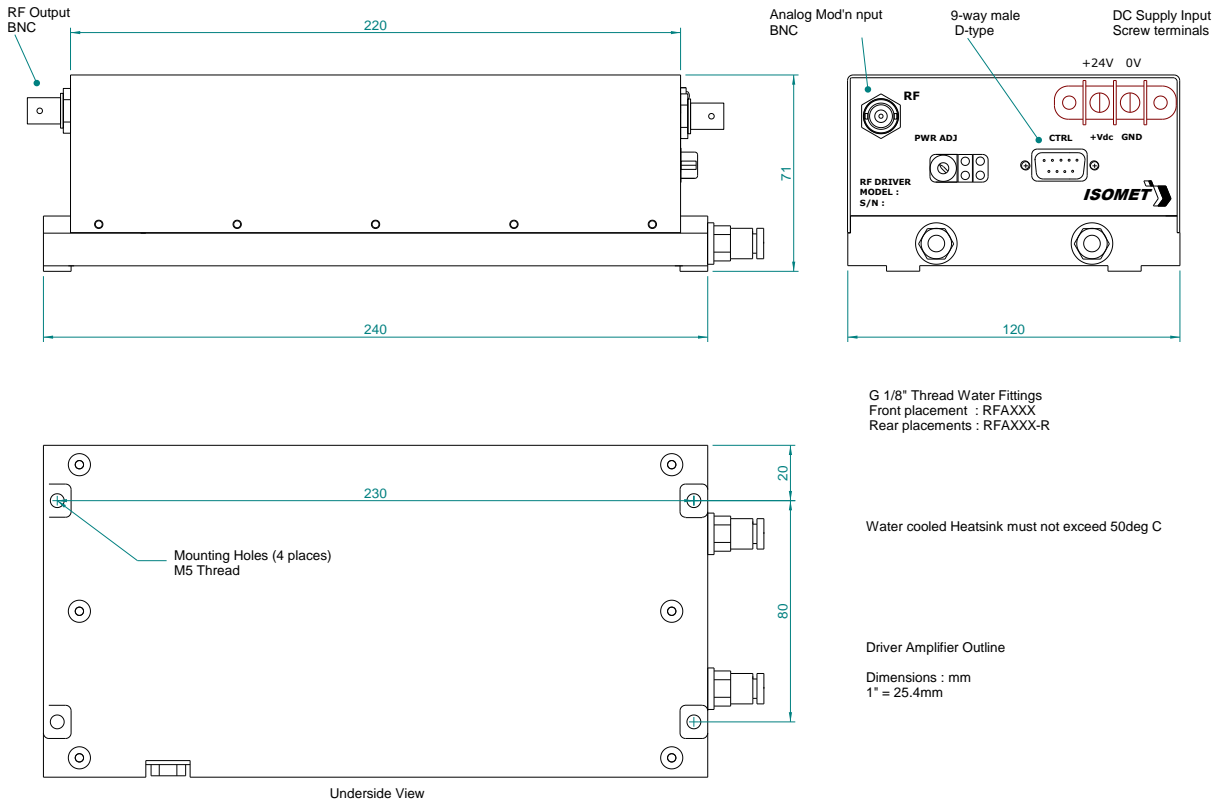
Driver Installation, Mounting Holes: 4 x M5
